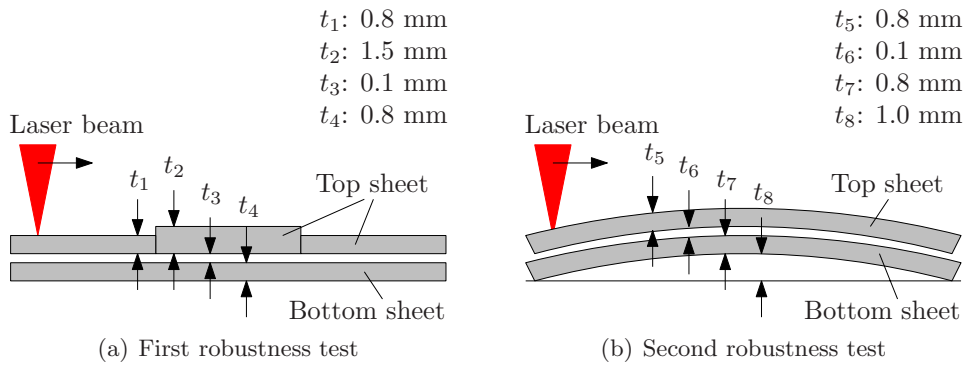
Schematic cross section along the weld seam of the workpiece used with the robustness tests.
